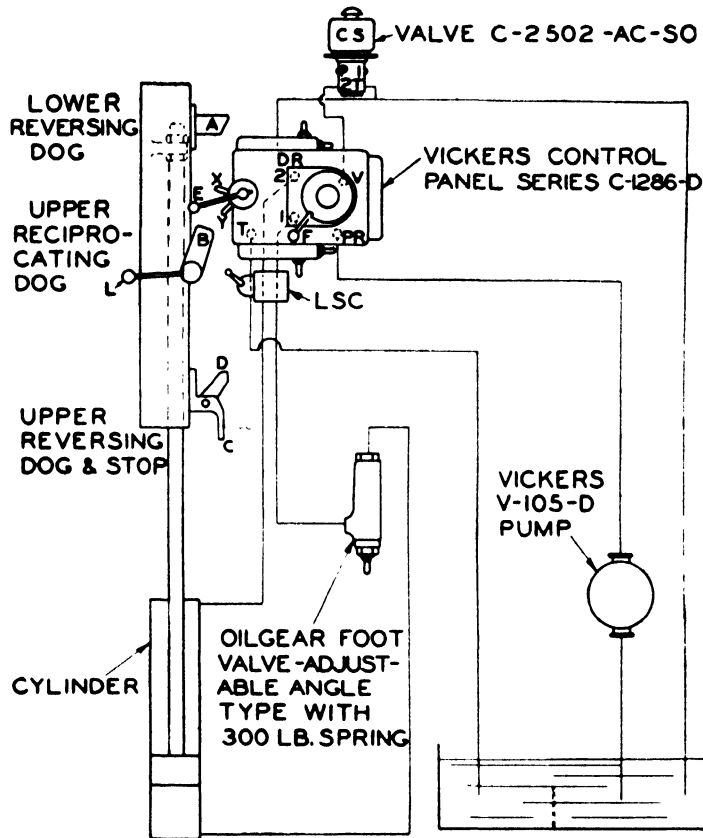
Hydraulic circuit of No. 15 hydraulic hone. (*The Moline Tool Co., Moline, Ill.*)
